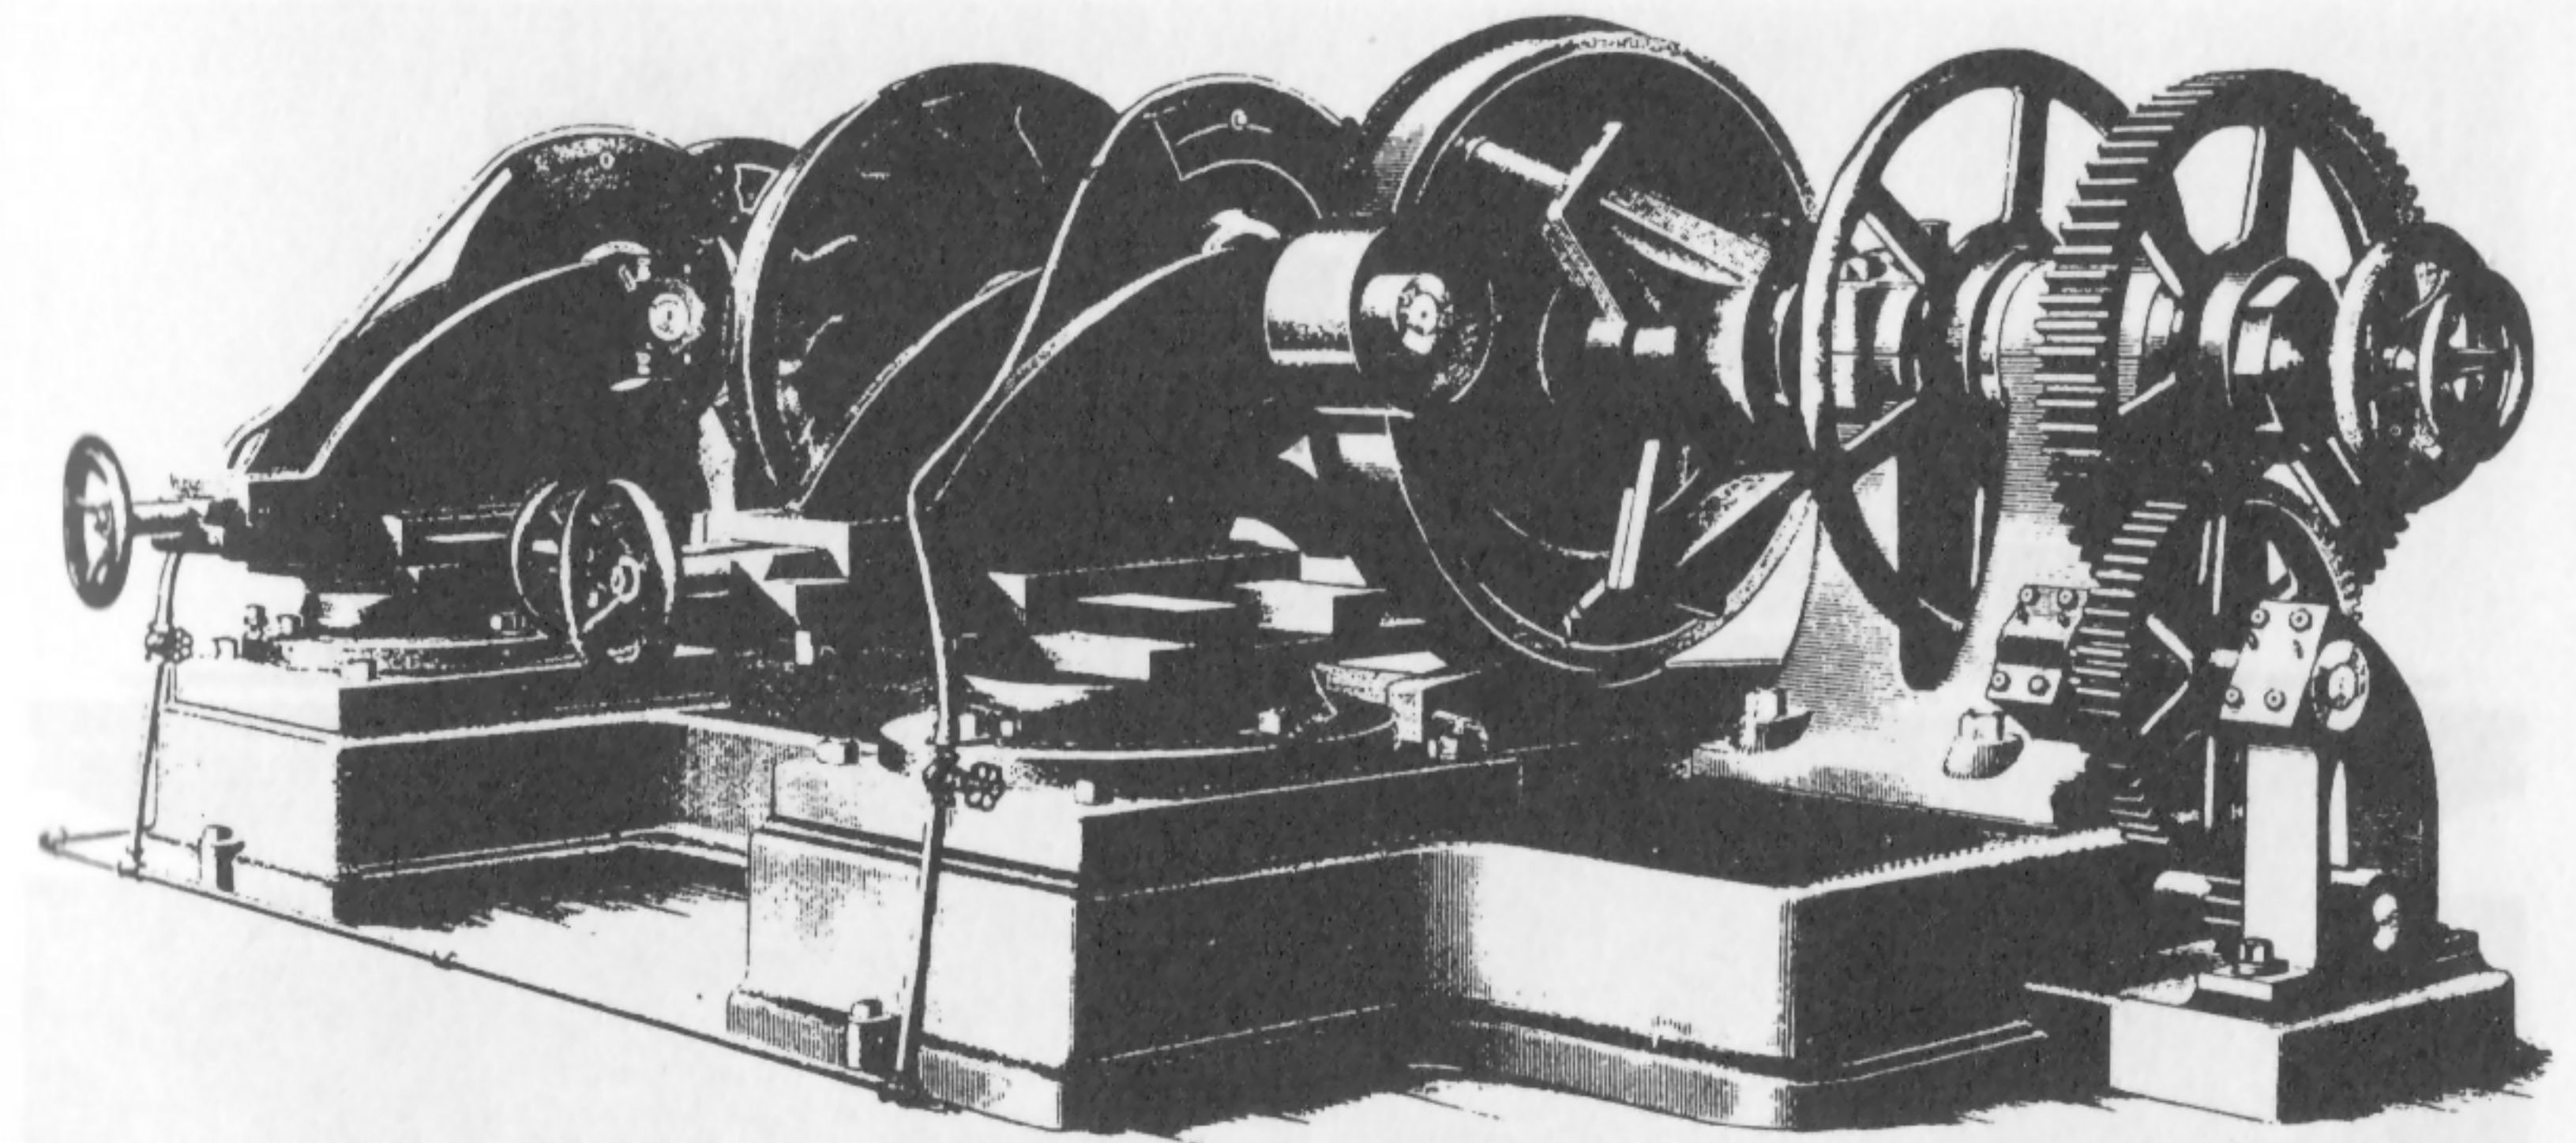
SPRINGFIELD CAR-WHEEL GRINDER, 1891 (*American Machinist*)
